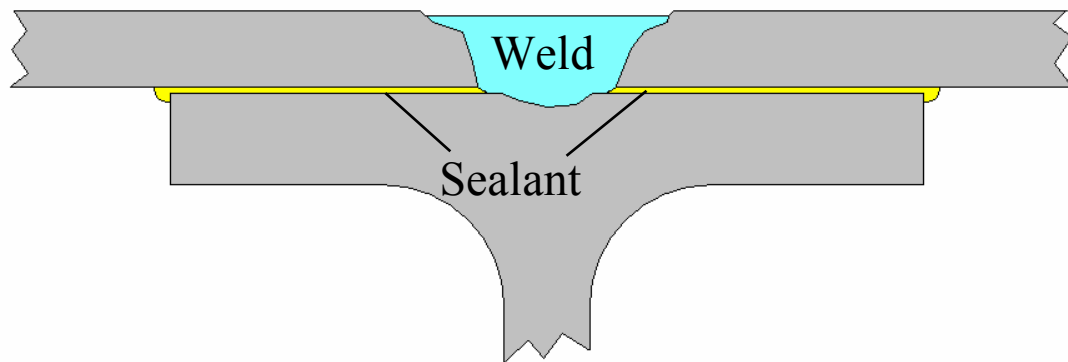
Cross-section schematic of friction stir welded lap joint with sealant for corrosion protection.
